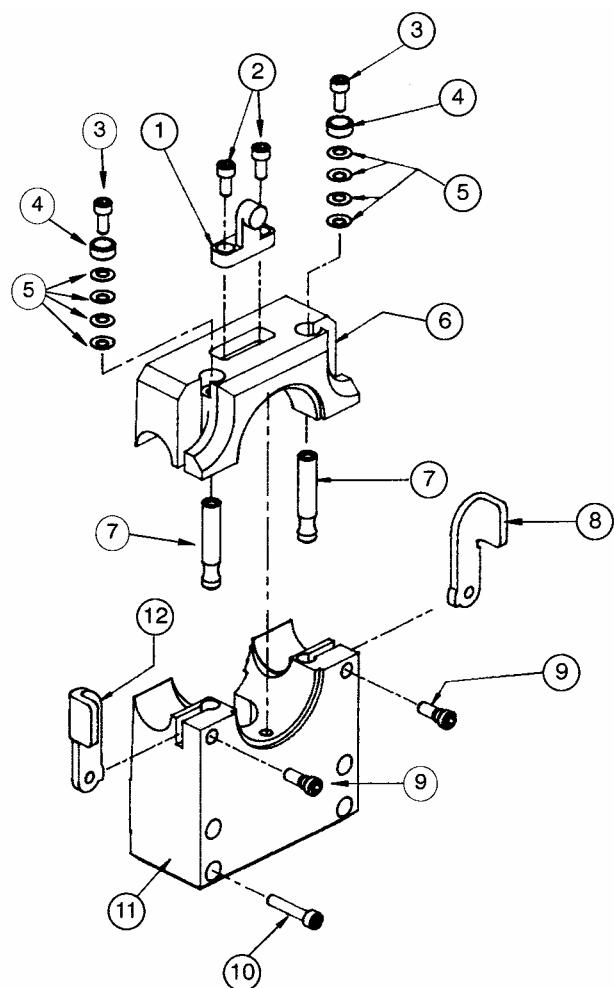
CWS-5FSP1 Special Purpose Fixture Block
